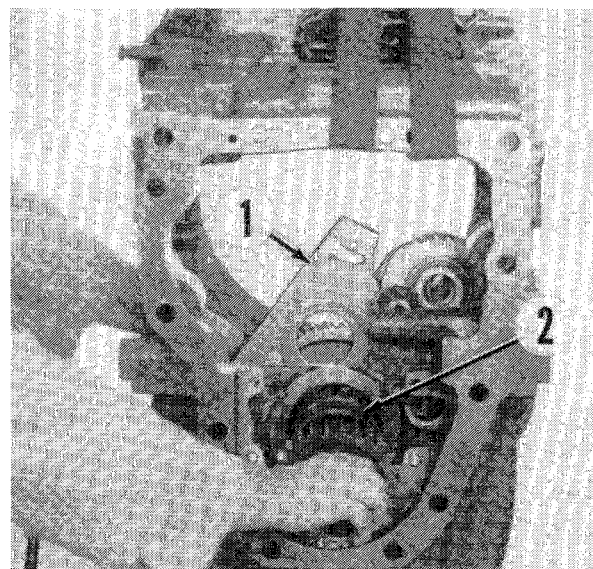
A—Clutch housing must be removed from tractor to remove sheet metal shield (1) and clutch shaft drive gear.
